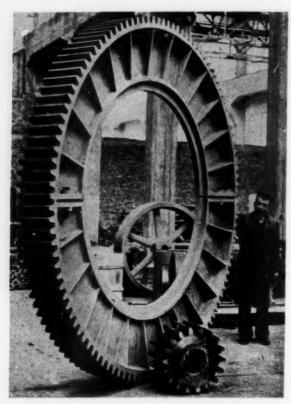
Heavy crown gear wheel, weighing 9900 lb, with pinion.
